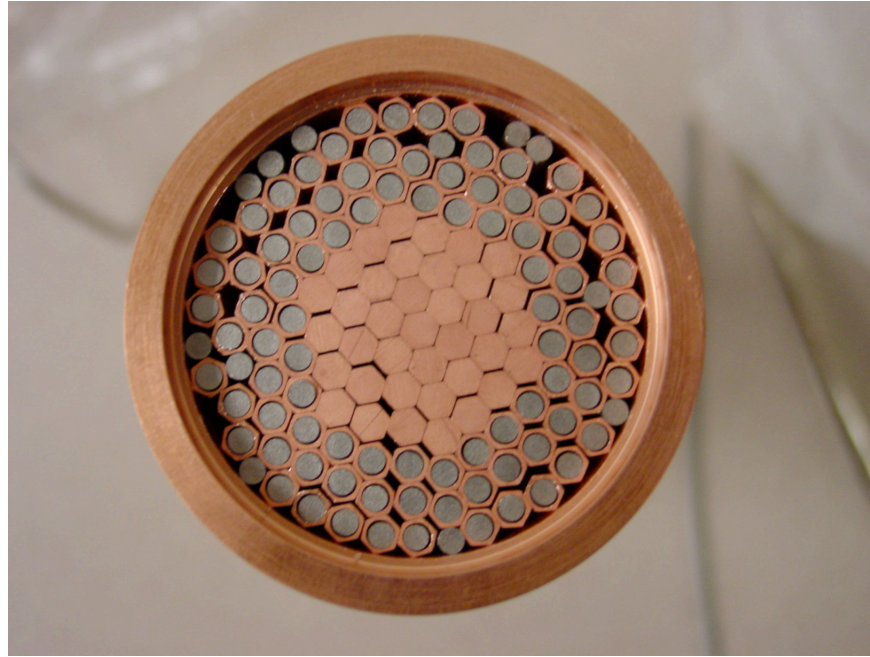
, 50.8mm (2") Ø billet before EB welding.
